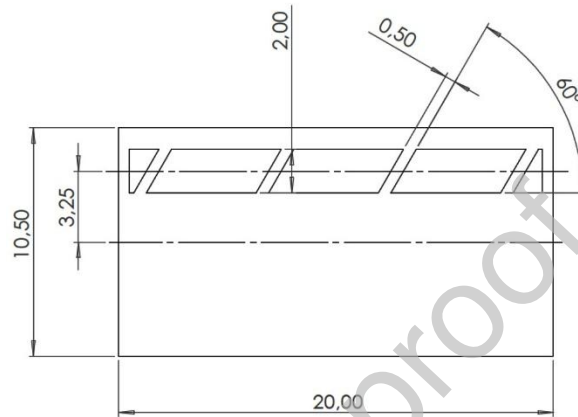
Frontal design of specimen in the printed configuration (before the hot-press step), with the dimensions indicated in mm.
